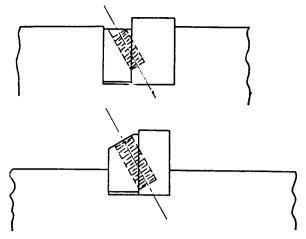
The movable part is held against one side of the groove while the T-nut is forced against the other side. The removal of the screw permits easy removal of the clamped part. Heavy pressure toward the side of the key out of contact with the slot can permit slight movement due to the springing of the screw.
